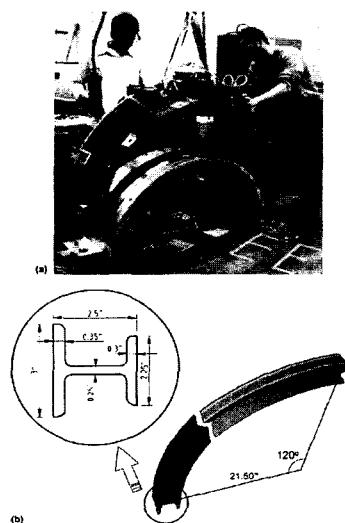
(a) Assemblage of mold prior to test; (b) shape and dimension of mold cavity[18].
